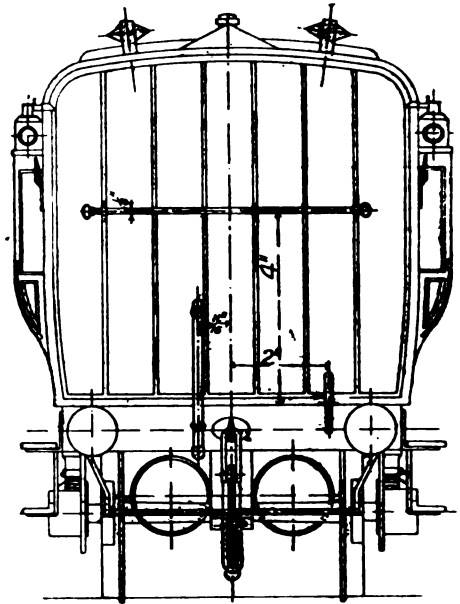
END ELEVATION OF MODEL G.N.R. BRAKE VAN.
